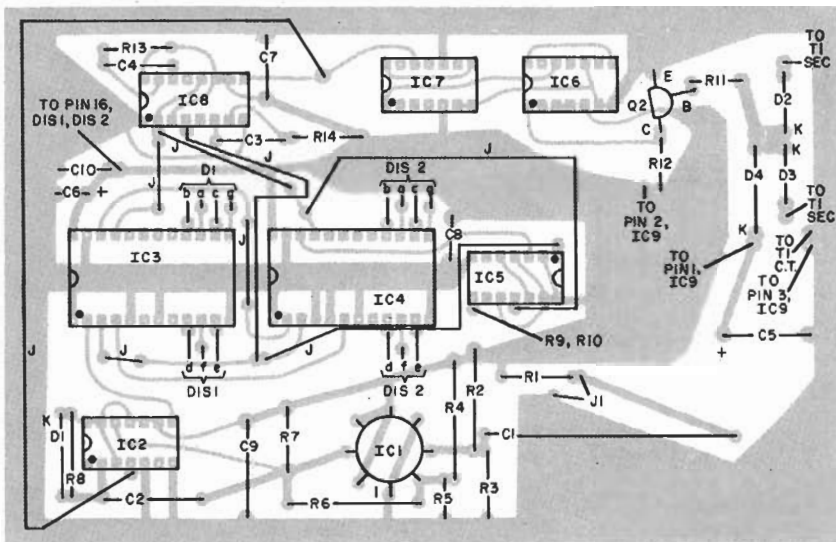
Full-size etching and drilling guide for pc board is shown above with parts placement guide at left.
